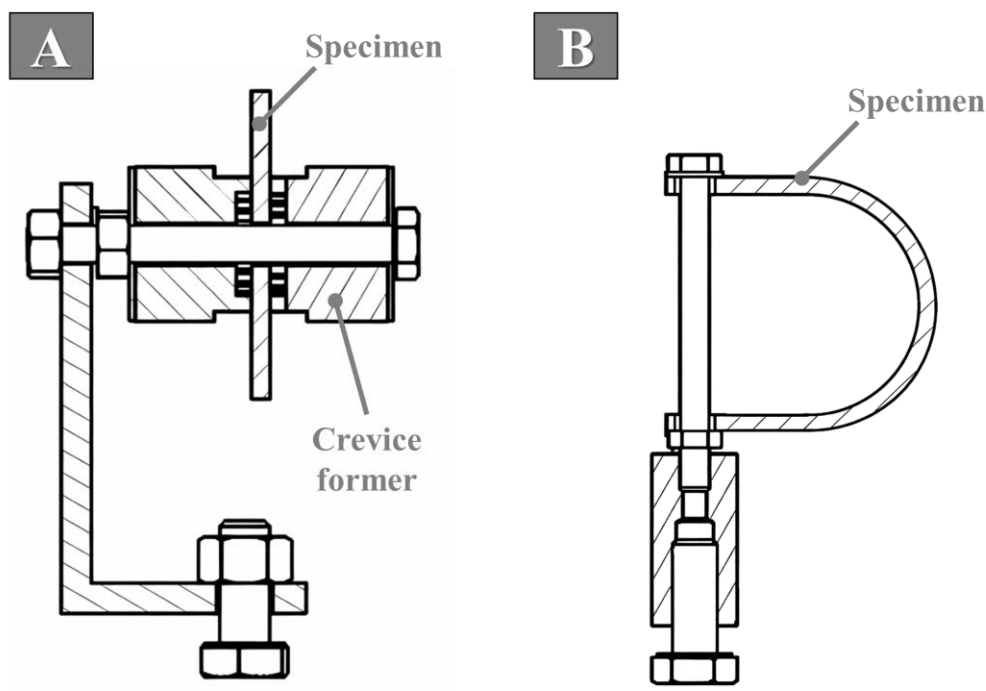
Assembly diagram of the A) Crevice and B) U-bend specimens on the plate
